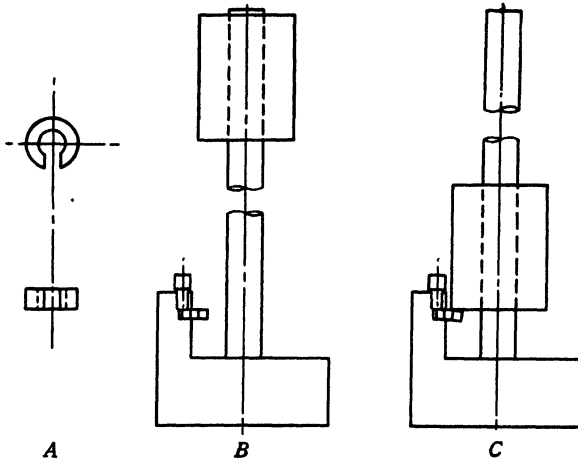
Fixture designed to test the shock resistance of a powder metallurgy component (according to Lenel<sup>18</sup>): *A*, design of component; *B*, test fixture with attached component; and *C*, deformation without fracture of component during impact testing.
